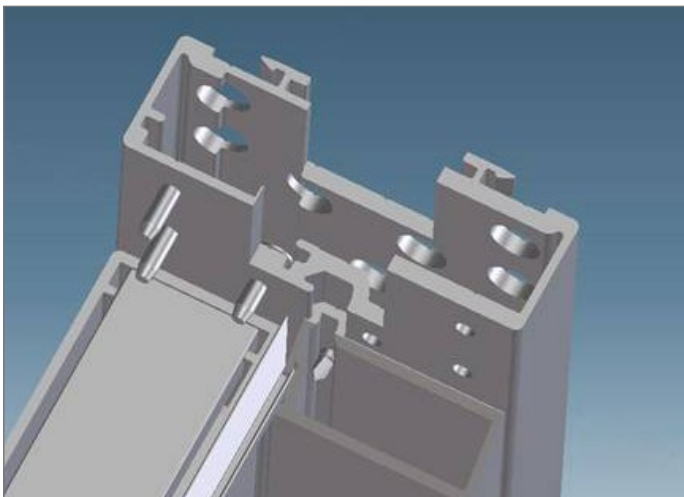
Exploded view of modified Butt Hinge Stop for application of aftermarket Gasketing.
